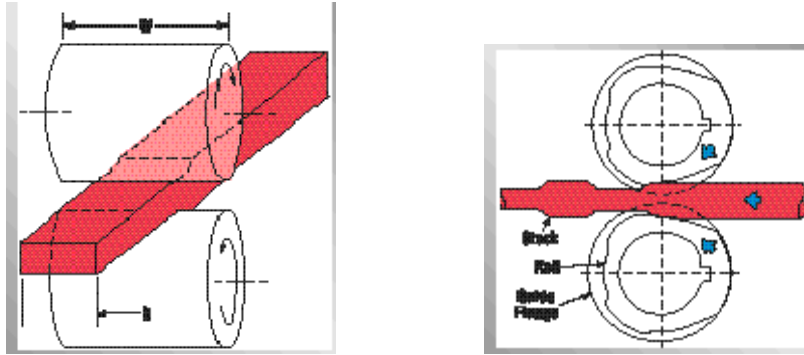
(a) Flat Roll Forging, (b) Roll Forging Using Special Shaped Rolls
